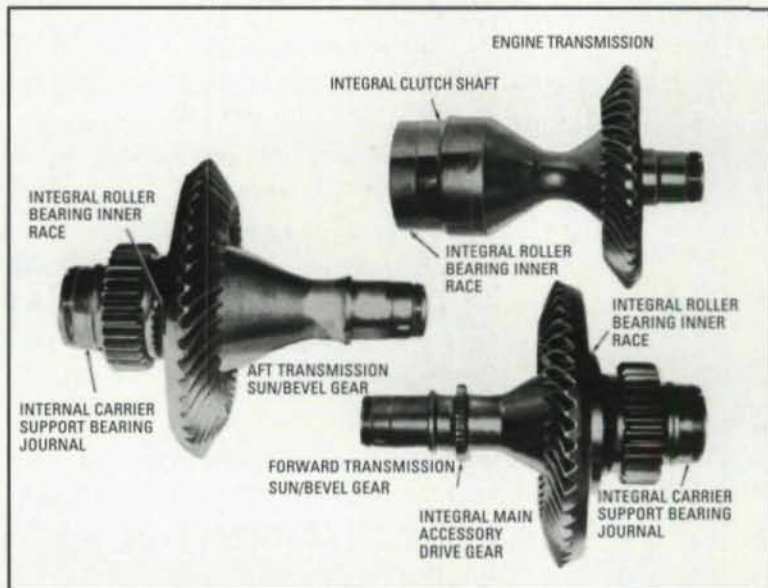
Representative example of a integral spiral bevel gears for the CH-47D helicopter.
